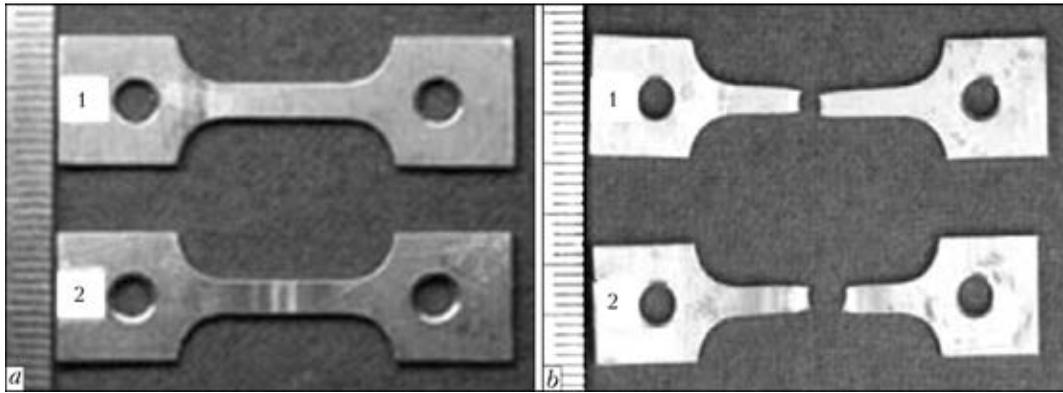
Appearance of specimens Mi-96 (steel Kh18N10T, $\delta = 3.5$ mm) before (a) and after (b) tensile tests: 1 – BM; 2 – butt joint
